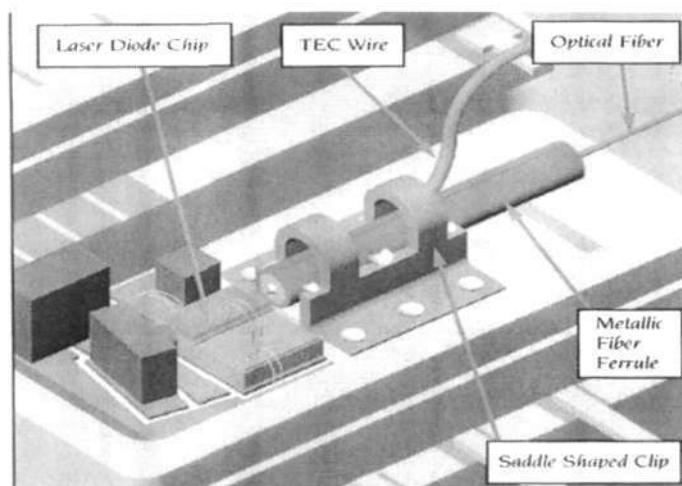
The inside of the completed butterfly package style LD module showing various components. The optical subassembly, including the bonded LD, is attached onto a TEC module to regulate the operating temperature. An optical fiber is then aligned to the LD with a Metallic Fiber Ferrule to provide the fiber with a housing necessary for rigidity and welding purposes. The metallic fiber ferrule is welded to the saddle shaped clip. Finally, the packaged assembly is completed by hermetically sealing it.
